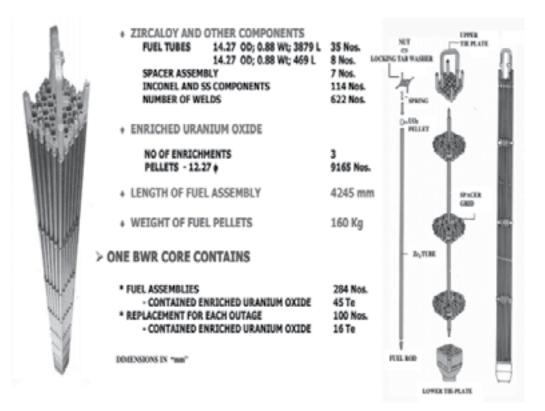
A Typical 6 X 6 BWR 160 Mwe Fuel Assembly Manufactured At NFC For Taps 1 & 2
